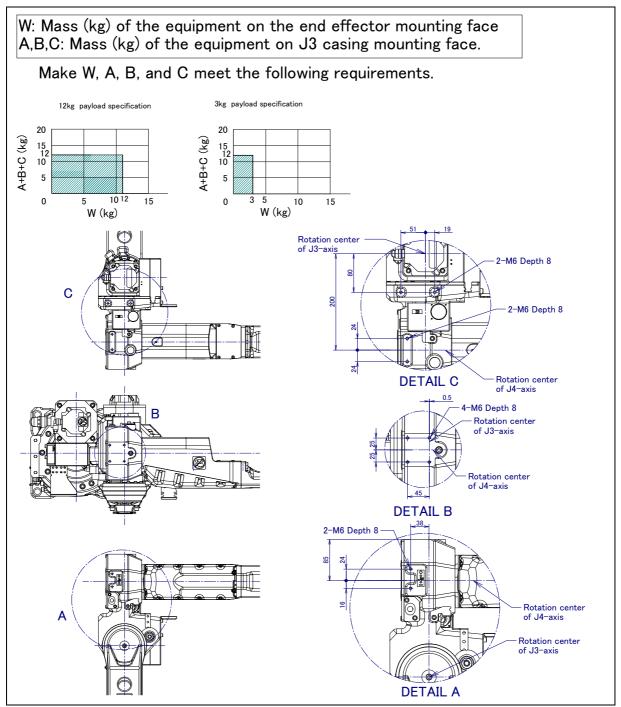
(c) Equipment mounting faces (ARC Mate 100iC/12S, M-10iA/12S)
